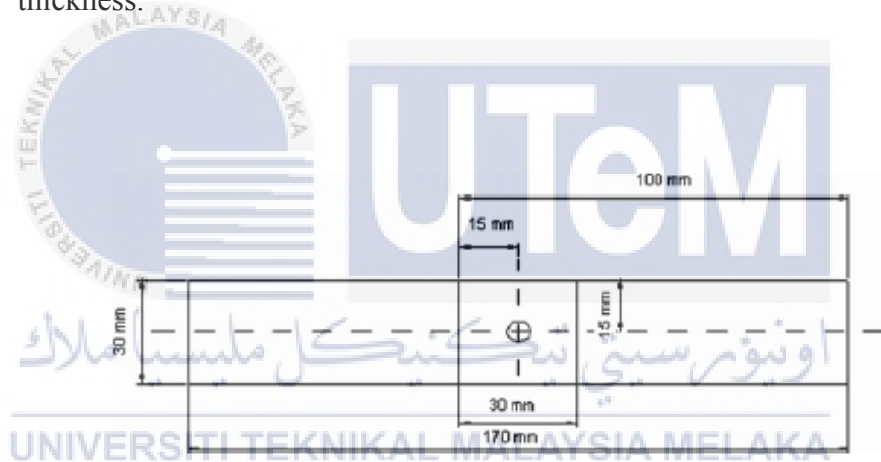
Specimens dimension (Aslanlar et al., 2007)
